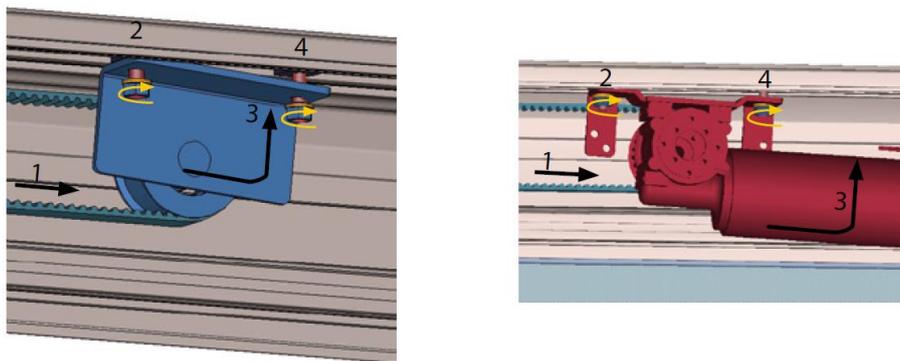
A.1 G-U compactMaster CM KIT CM (Gretsch-Unitas Ltd, 2010). The idler pulley assembly and the drive unit are partly installed by tightening two screws (2) when there is some tension present in the belt. When turning the remaining two screws (4), more tension is obtained.
